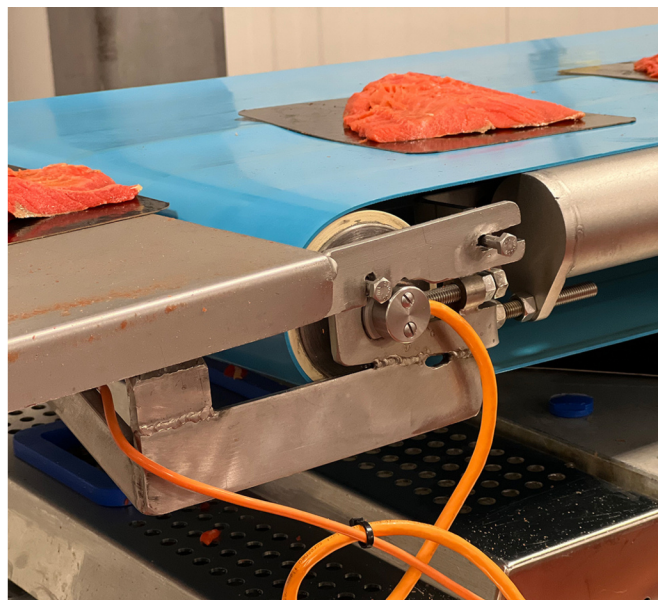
Stainless steel motorized pulley driving solid positive drive belt in protein processing.
